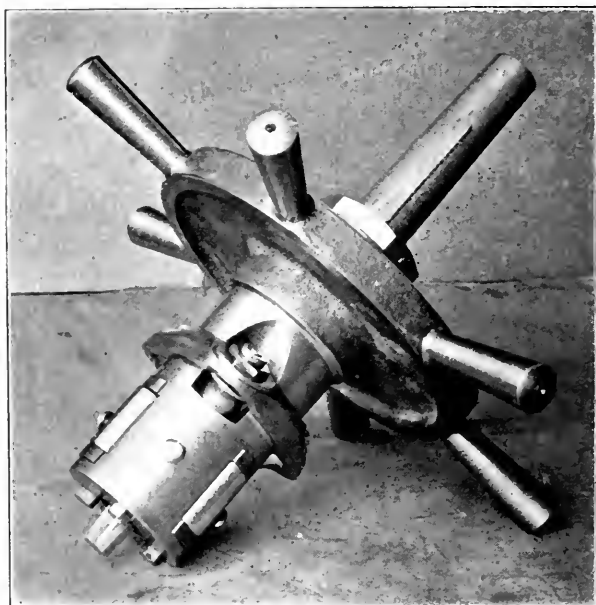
Lovekin patent expander and beader for light metal tubes.
